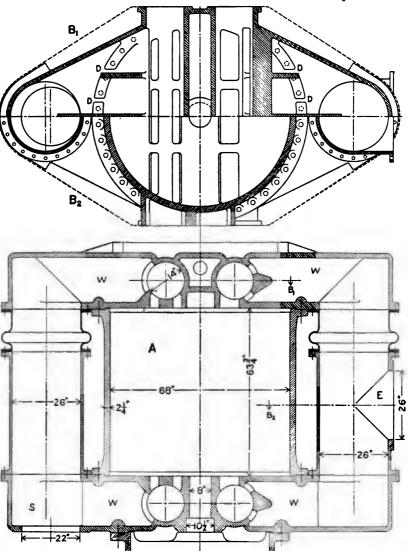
Large Corliss Cylinder with valves in heads and separate sidepipes; low-pressure cylinder of 32" and 68" by 48" vertical cross-compound engine, Allis Chalmers Company; compare Fig. 219. Scale 1 to 36.
